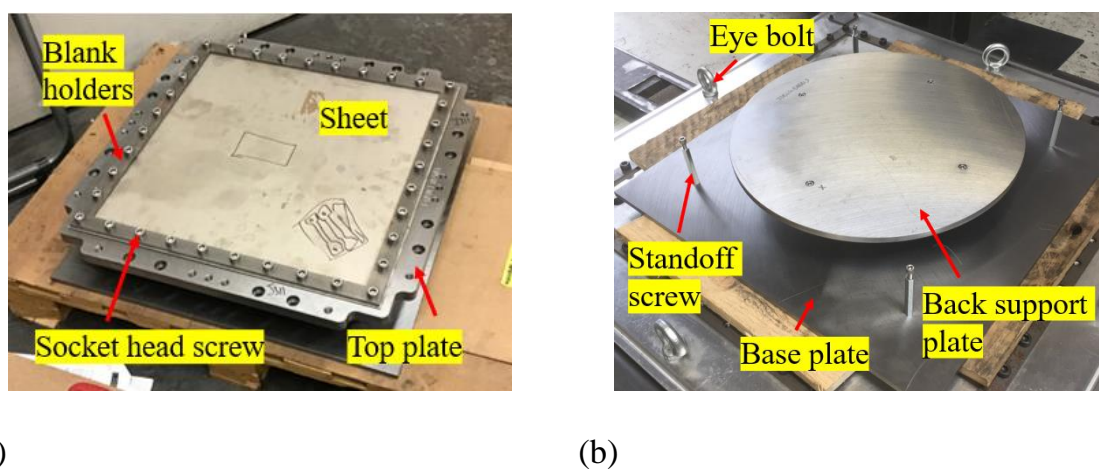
LMD fixture: (a) Fully assembled; (b) Back-support assembly.
